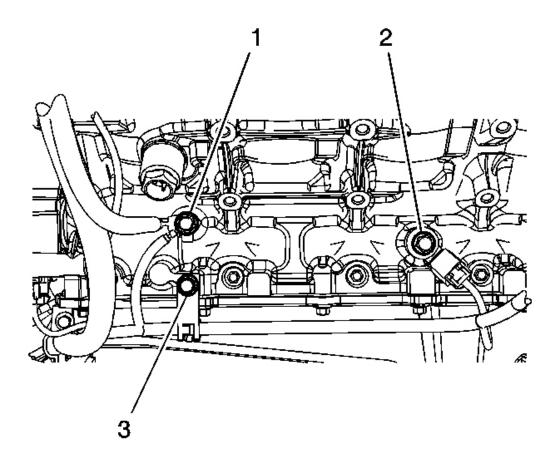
Ground Terminal Bolt Courtesy of GENERAL MOTORS CORP.
